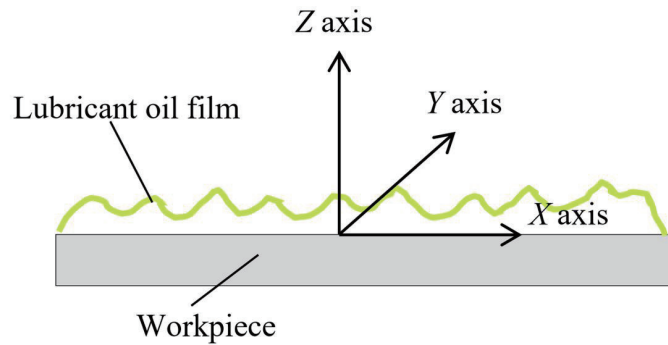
Illustration z axis for lubricant oil film thickness measurement
